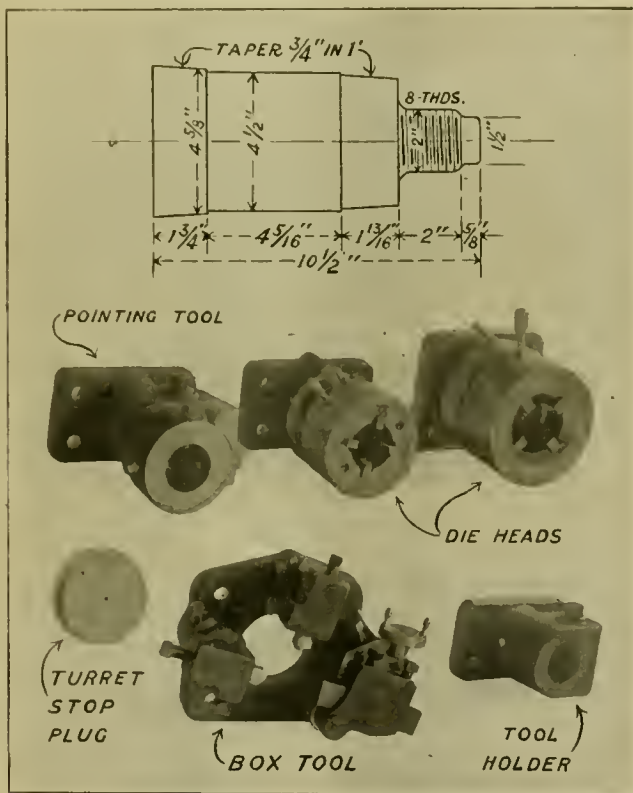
WRIST PIN AND TOOLS USED TO MACHINE THREADED END.
